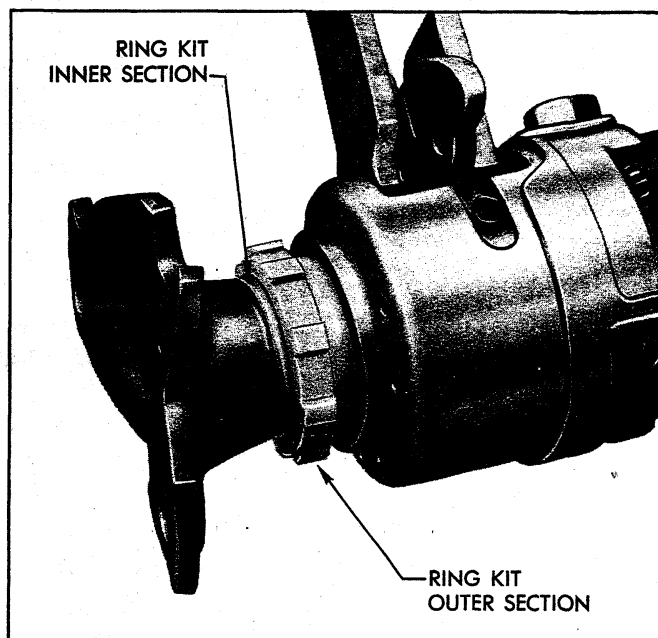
Tolerance Ring Kit—First Adjustment
